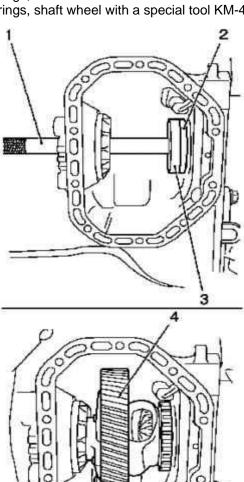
Installation of external rings of roller bearing: 1, 3 - a special tool, 2 - roller bearing, 4 - differential
